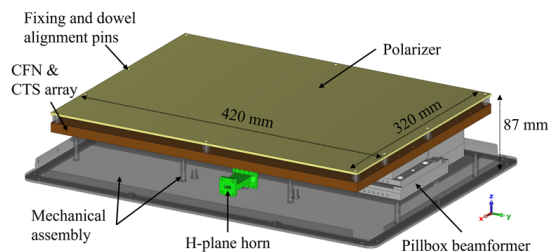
Perspective view of the antenna with its polarizer and mechanical assembly.
